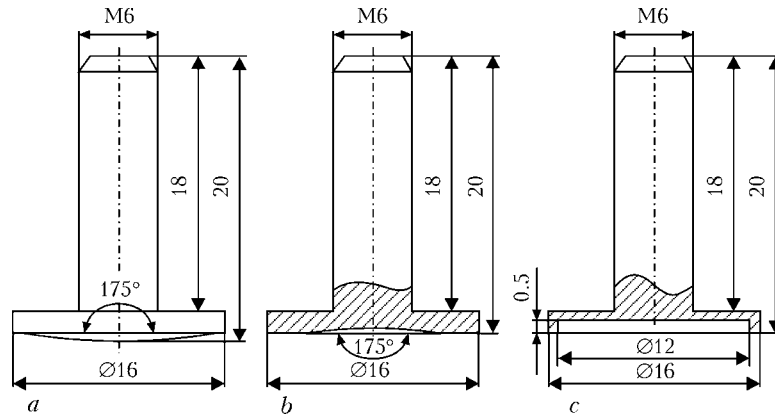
Sketches (a-c) of steel studs for welding to aluminum sheet using short-cycle welding with rotating arc
